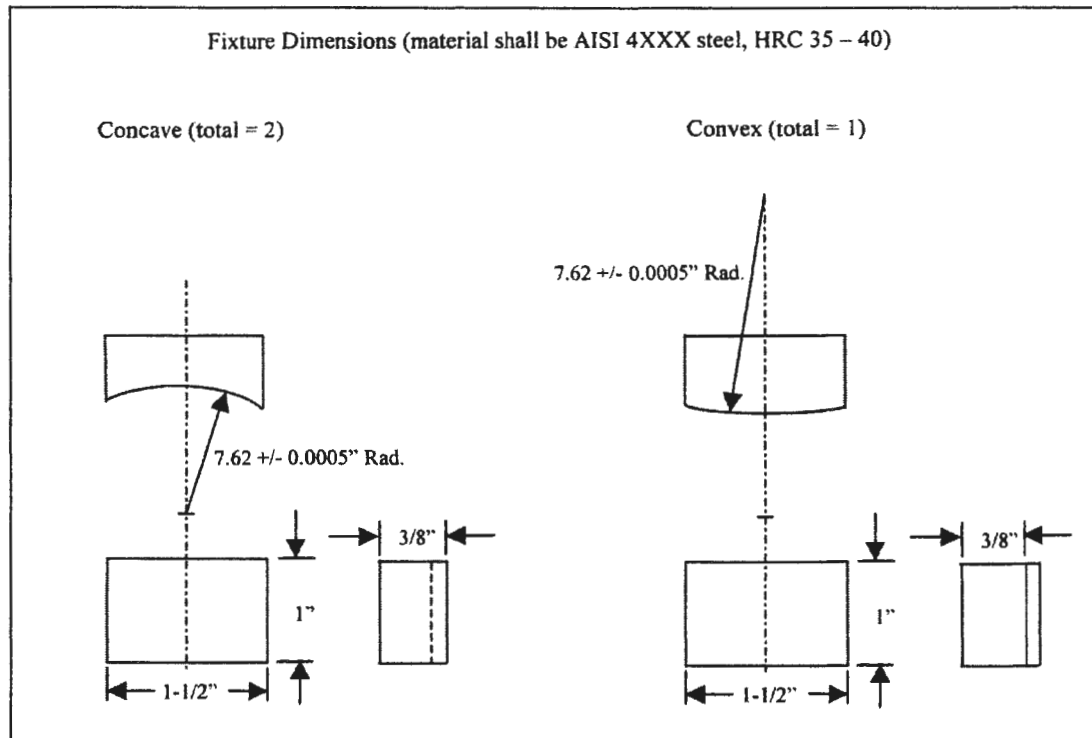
Fillet weld fixture dimensions (material shall be AISI 4XXX steel, HRC 35–40).
